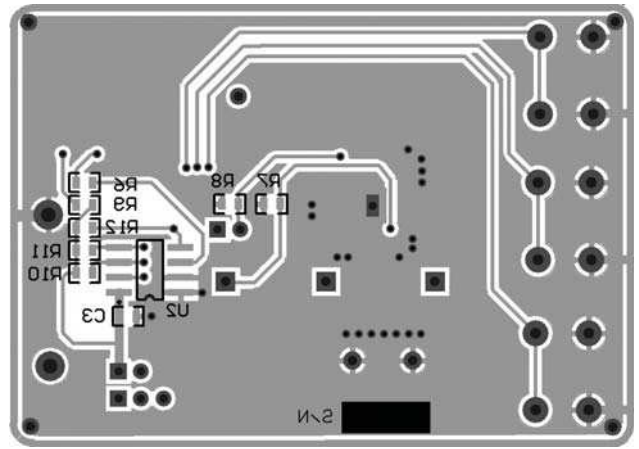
AAT2868 Evaluation Board Bottom Side Layout.
